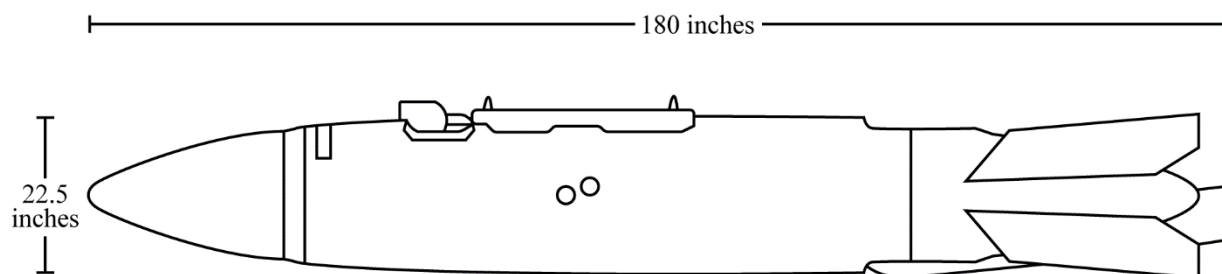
Tank, Aircraft, TMU-28/B - Line Drawing
